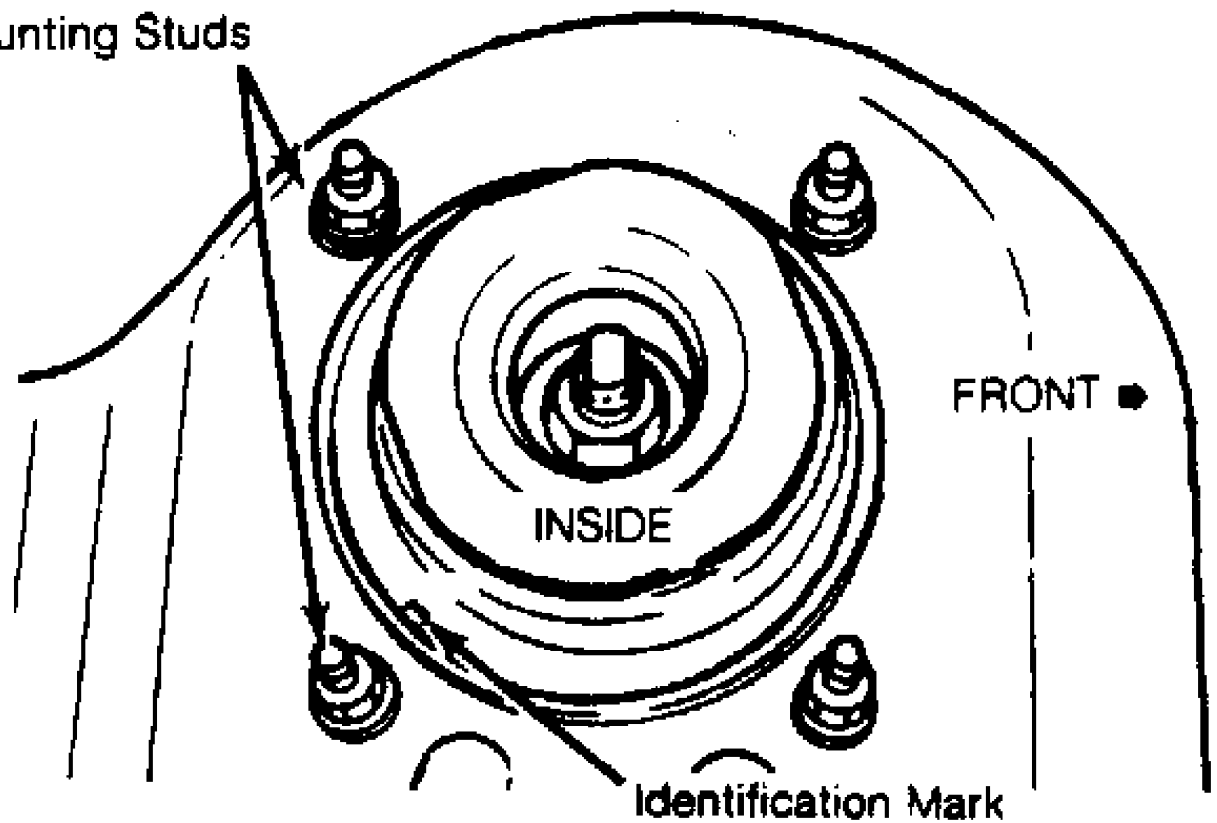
Positioning Strut for Installation (MX-6, Protege, 323 & 626)
